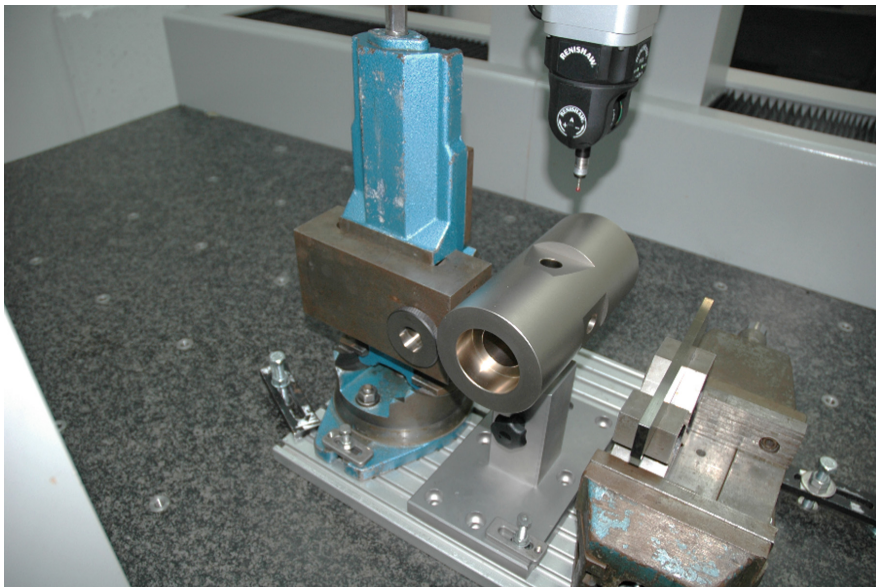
Measurement of calibrated workpieces and MFC standard during validation of virtual model for five-axis CMM
